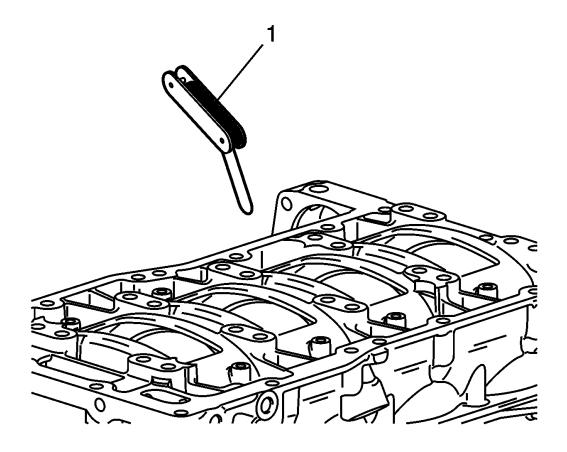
Checking Rod Side Clearance With Feeler Gage Courtesy of GENERAL MOTORS COMPANY
